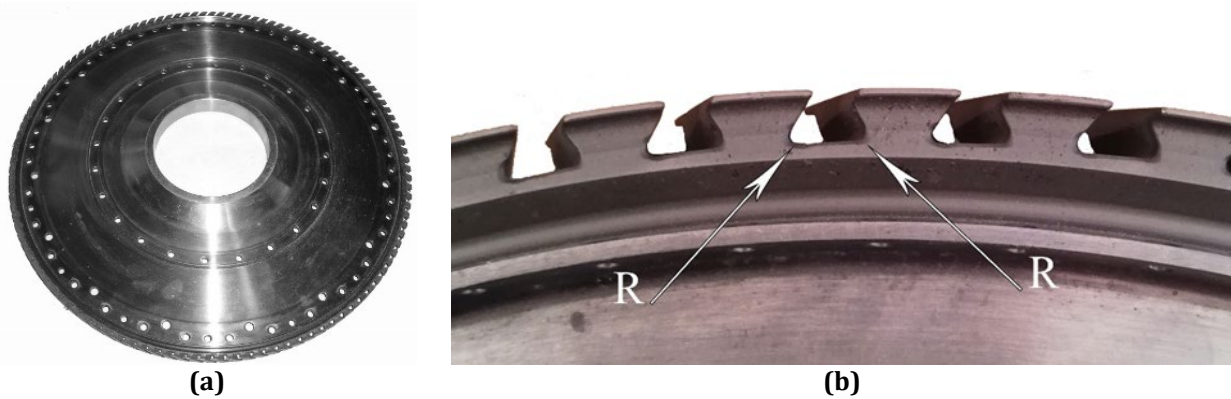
General view of (a) High-pressure compressor disc; and (b) Of dovetail grooves
